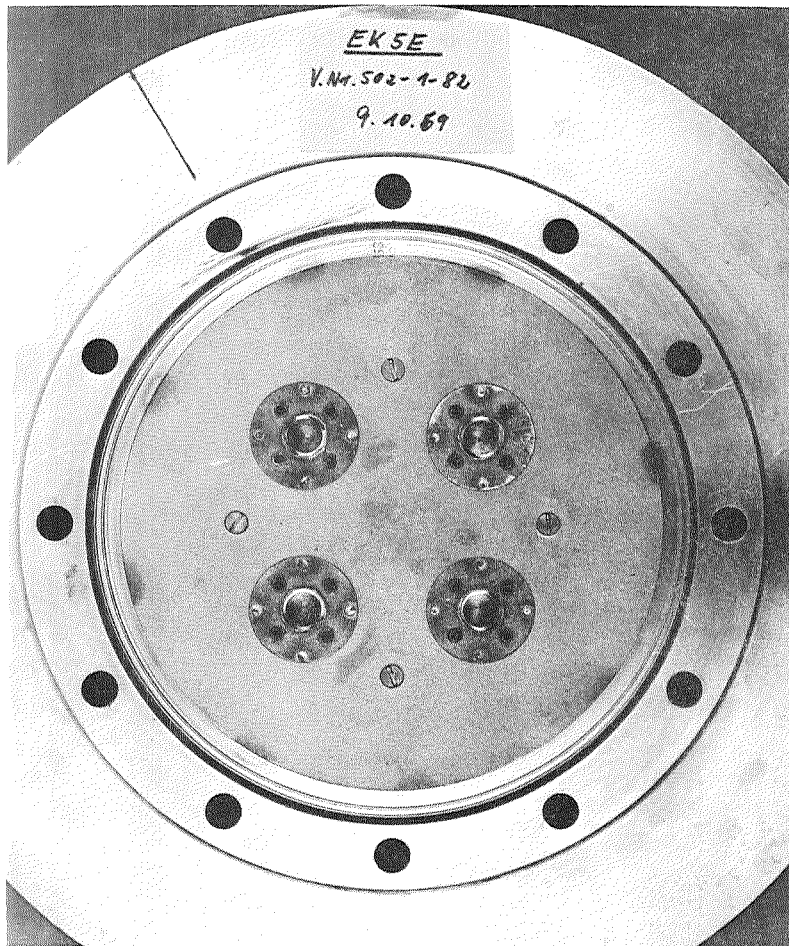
Pentad injector for the 1,100-lb H₂/F₂-engine
